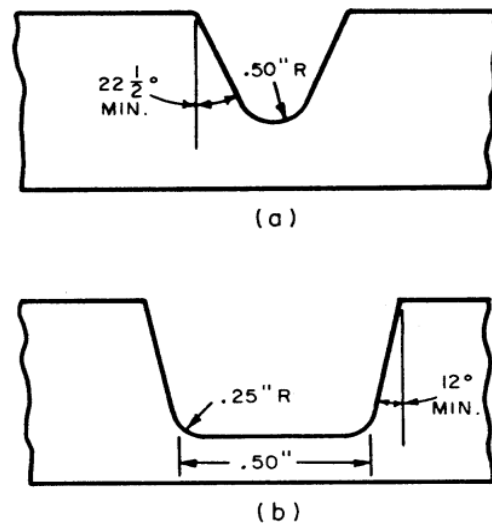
Weld Preparations for partial penetration welds: (a) for minimum root width, (b) for bottom cavity greater than $1/2''$ [51].
